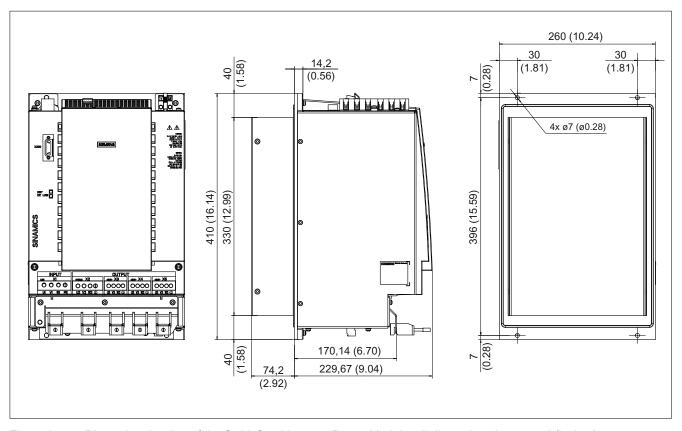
Dimension drawing of the S120 Combi 4 axes Power Module, all dimensions in mm and (inches)
